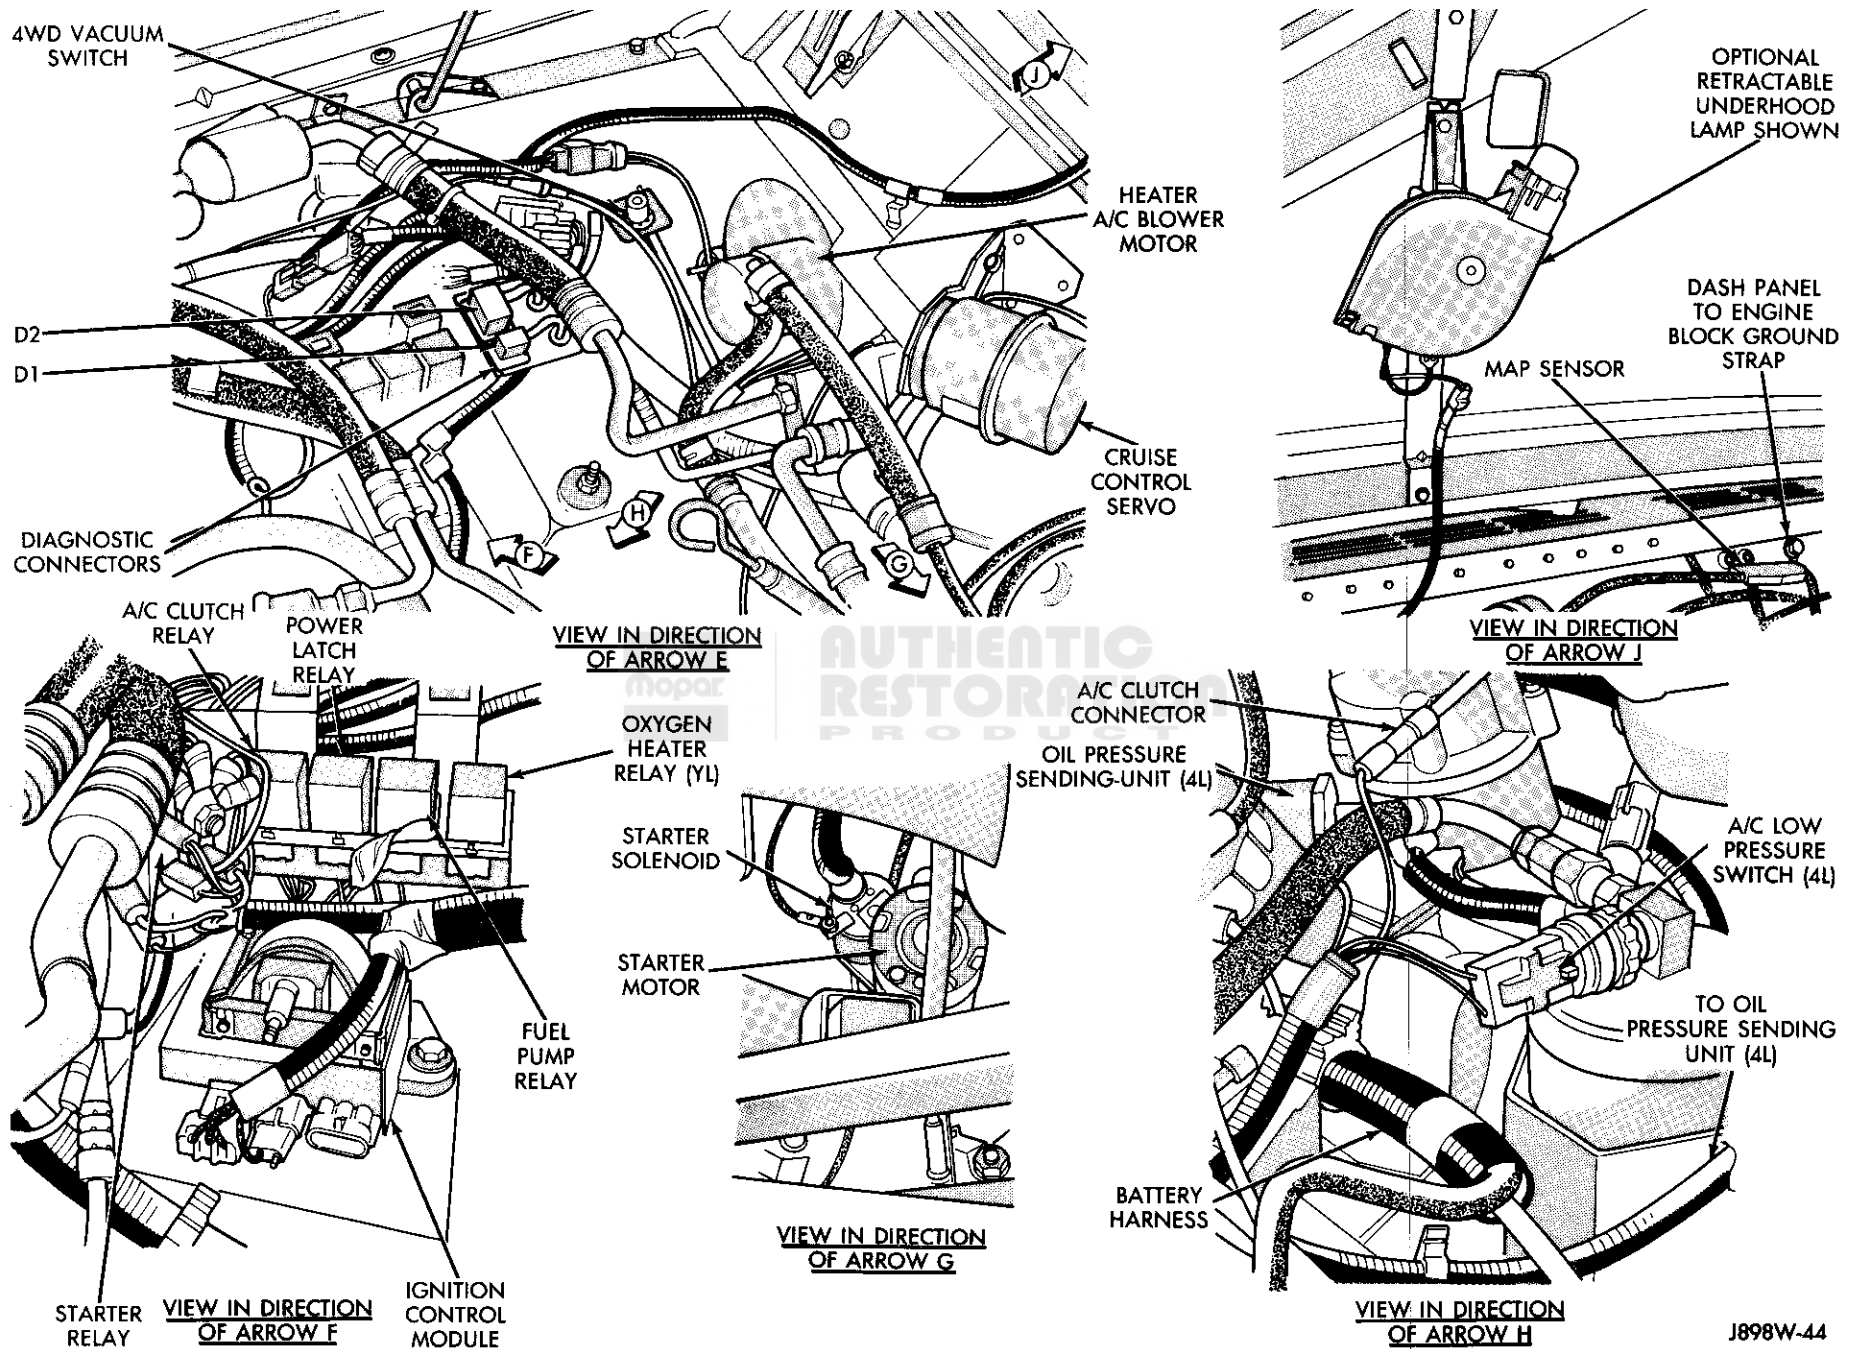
Engine Compartment Component Wiring — MJ, XJ
